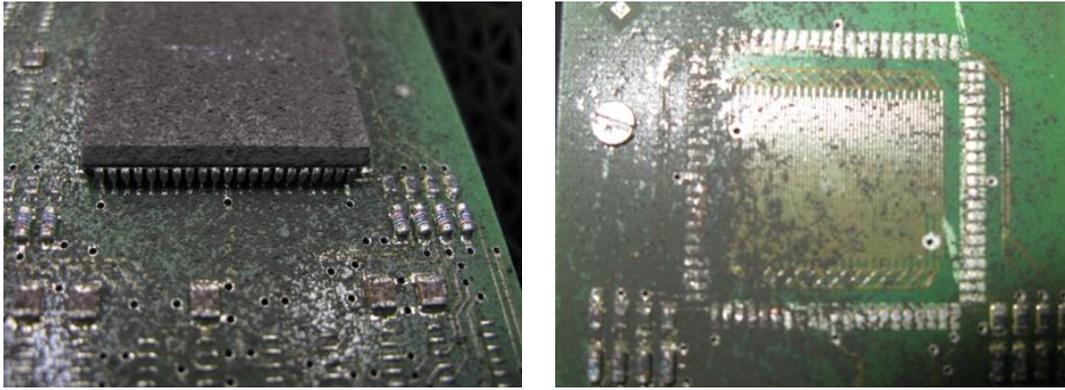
IC on circuit board (left) and exposed SIR single measuring comb (right) after fire test
